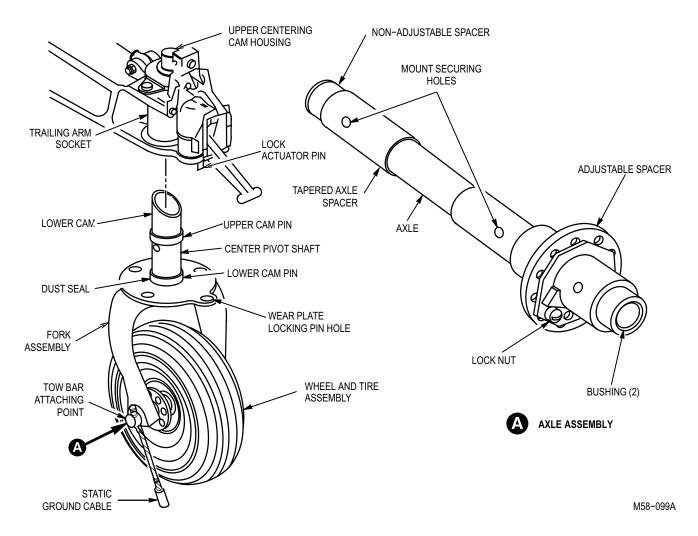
Fork and Axle Assembly, Wheel Centering Mechanism, and Wheel and Tire Assembly
